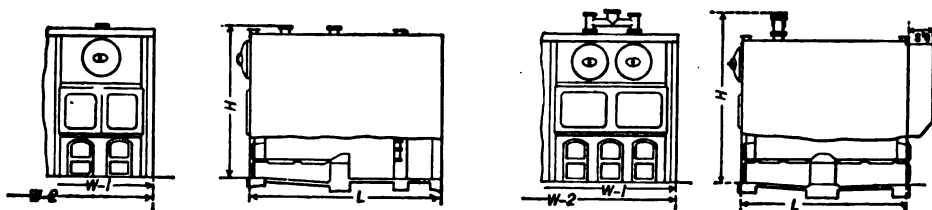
DIMENSIONS OF THE PARKER WATER-TUBE BOILER.
